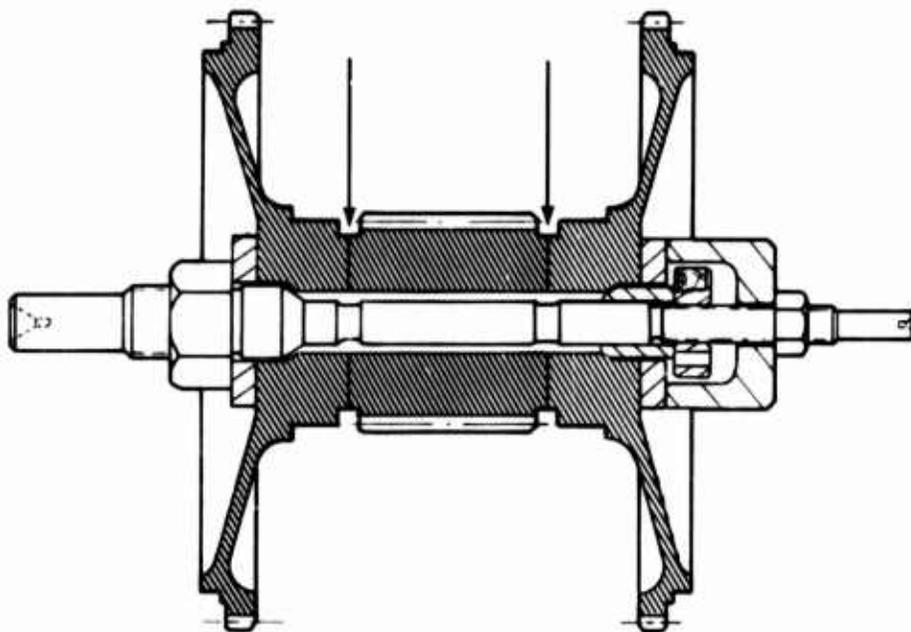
Welding Fixture for First-Row Pinion Butt Weld.
